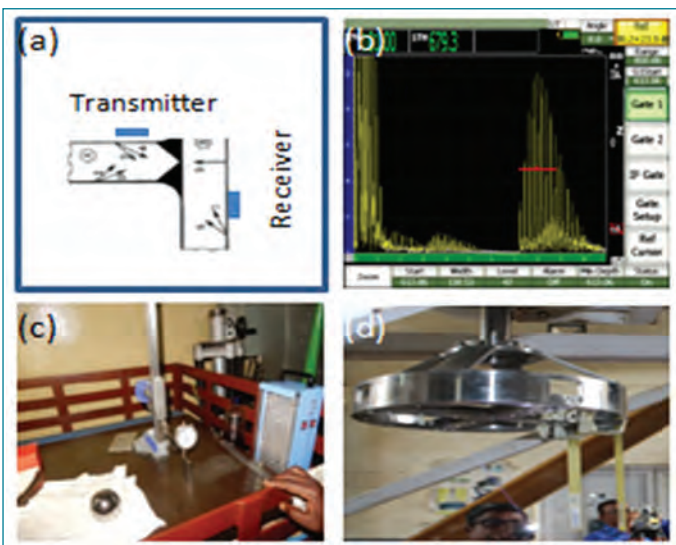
(a) UE of K-type corner welds of Roof slab sector, (b) presence of solidified sodium in bottom dished end of IHX, (c) dimension inspection of LRP bearing ball, (d) measurement of scanning plane variation using optical instruments
